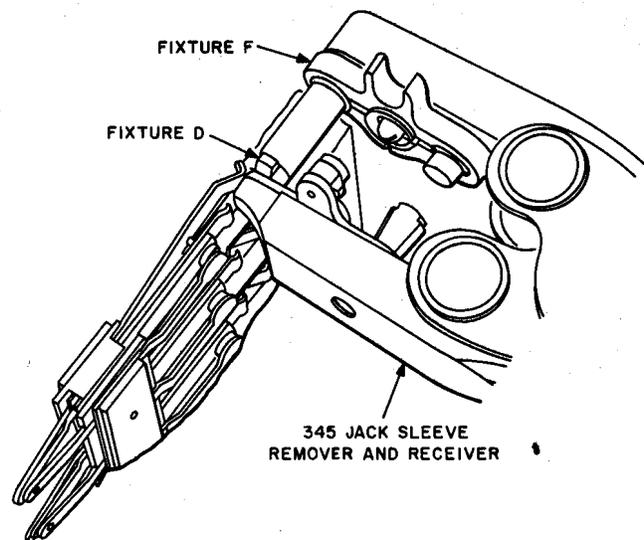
Method of Locking Sleeve in Place and Flaring Front of Sleeve on 92-, 229-, and 292-Type Jacks
